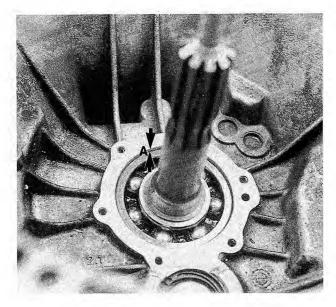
Input shaft bearing depth in case (dimension A).
